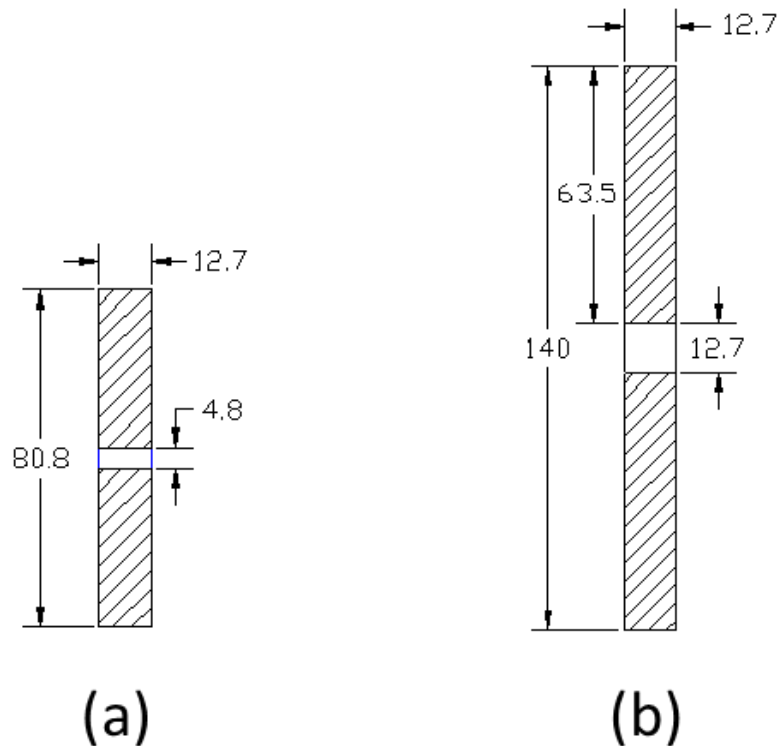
(a) SACMA SRM 1R-94 compressive strength specimen [29], (b) ASTM D6641 specimen [28]. Dimensions shown have units in mm
